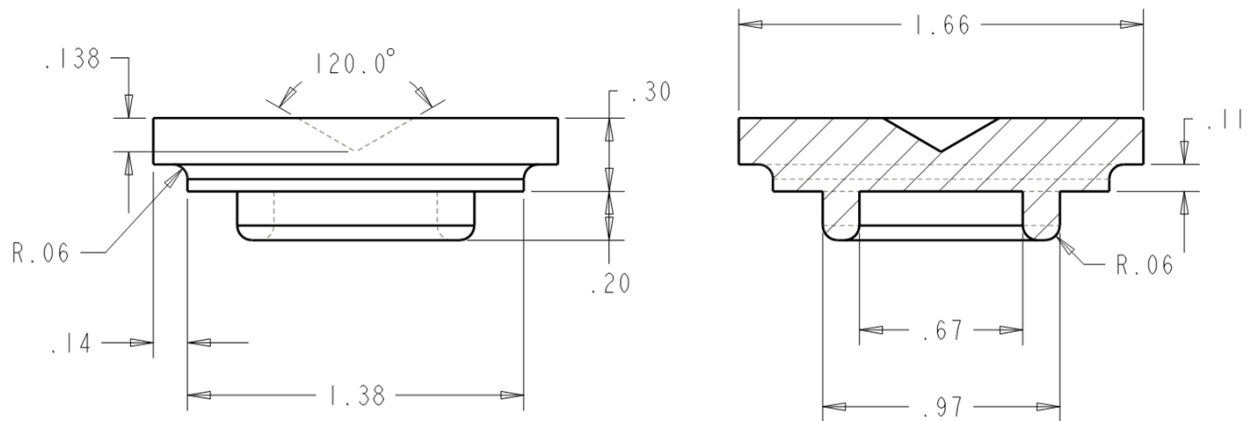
Dimensions of the loading ring used for room-temperature ring-on-ring testing
